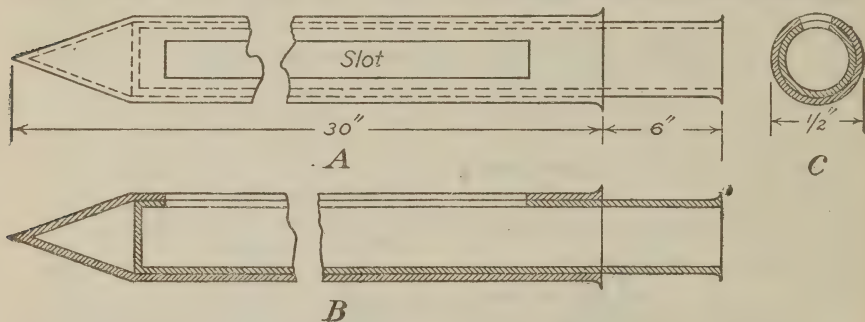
Sections of sampling device (not drawn to scale). A, Longitudinal section, showing slot; B, longitudinal section, samples turned 90° from position A; C, cross section through slot.
